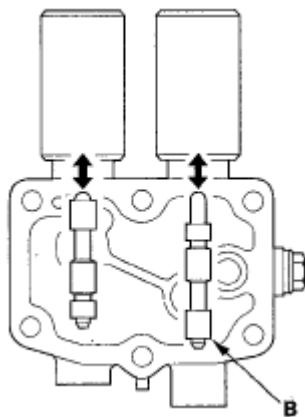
Identifying A/T Clutch Pressure Control Solenoid Valve B
